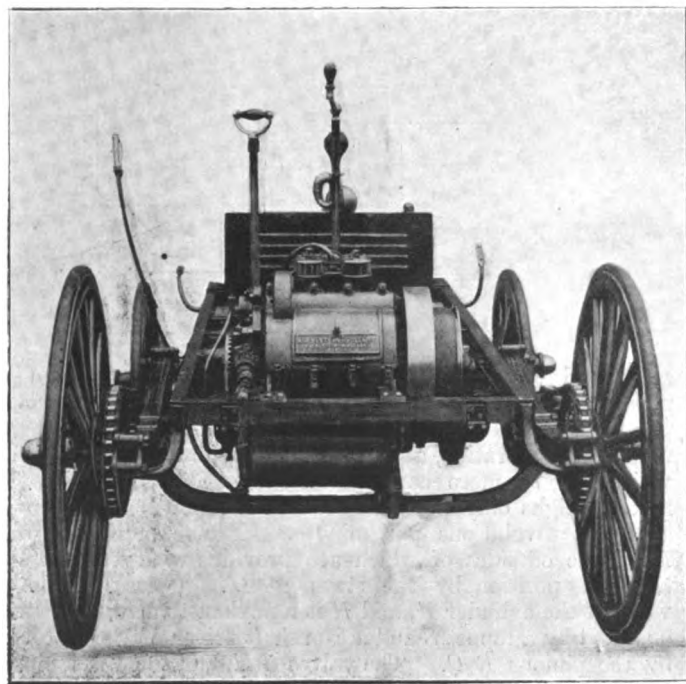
REAR VIEW OF KÜHLSTEIN-VOLLMER CAR, WITHOUT BODY.
